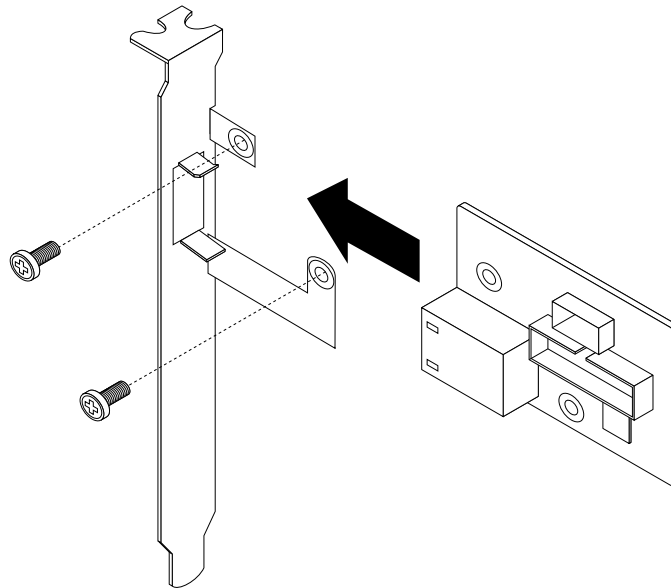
Removing the PCI card slot bracket for the RMM3 connector
